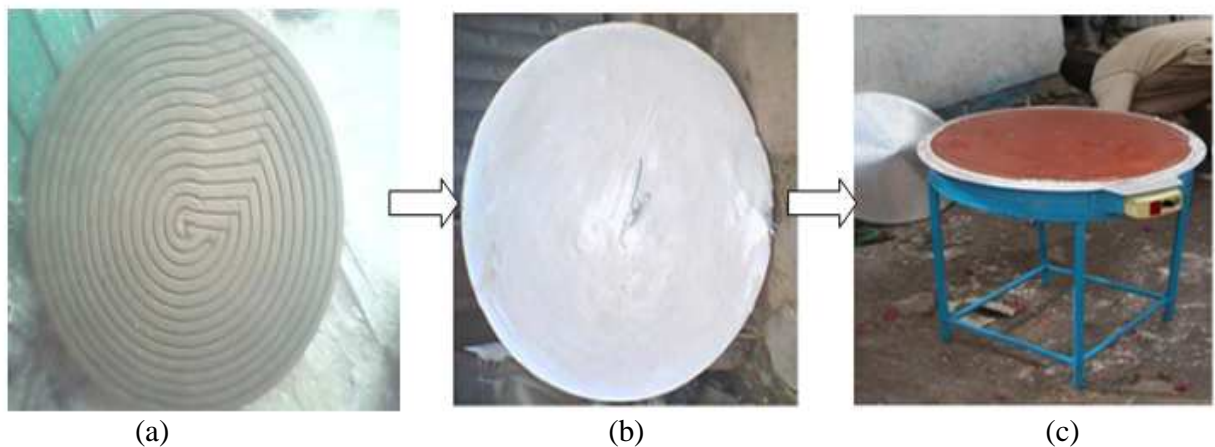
a) Back side of baking pan and its groove b) Baking pan with resistors embedded and molded with gypsum c) Assembled conventional baking pan
